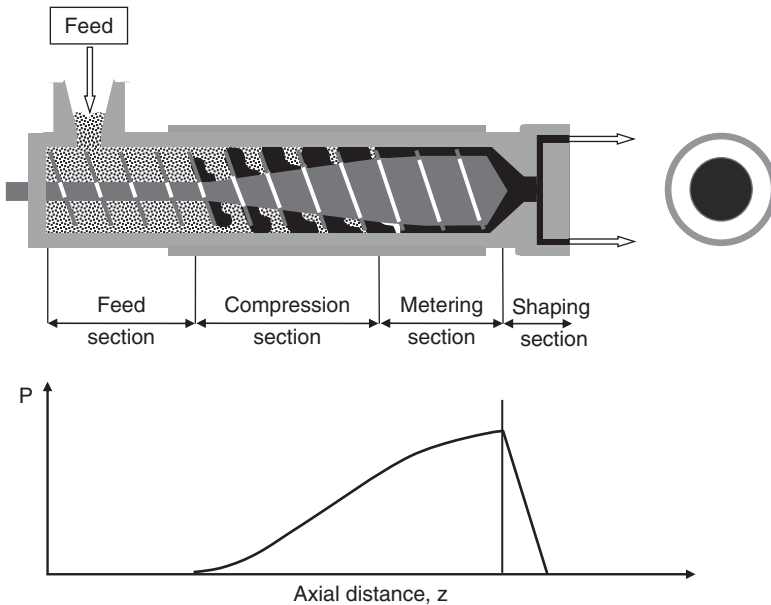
Thermomechanical processing in a monobloc single screw extruder.
